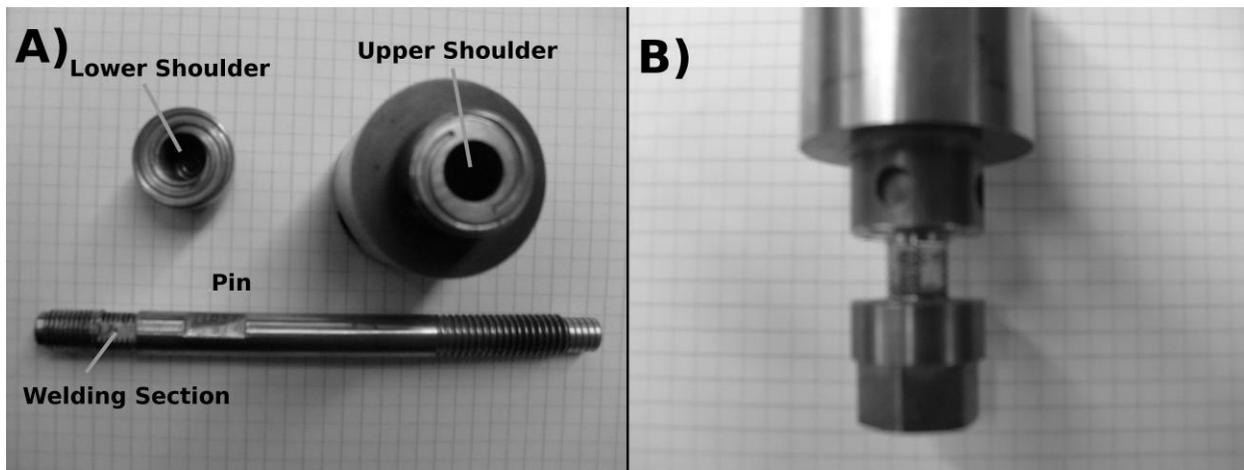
A) Sections of self-reacting tool, and B) Assembled tool.
